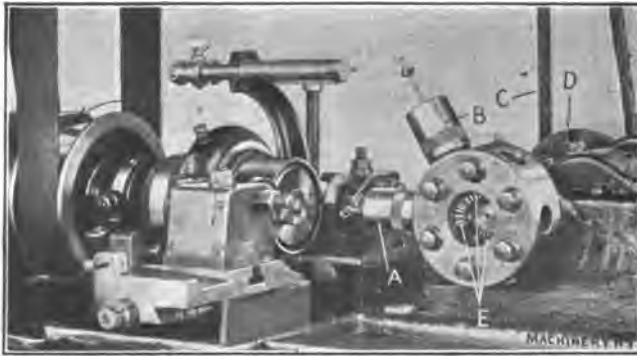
No. 2 Brown & Sharpe Automatic Screw Machine equipped with Drilling Attachment
